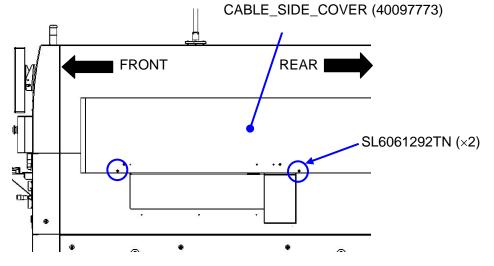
Removal of Cover of Machine with M and L Board Specifications
